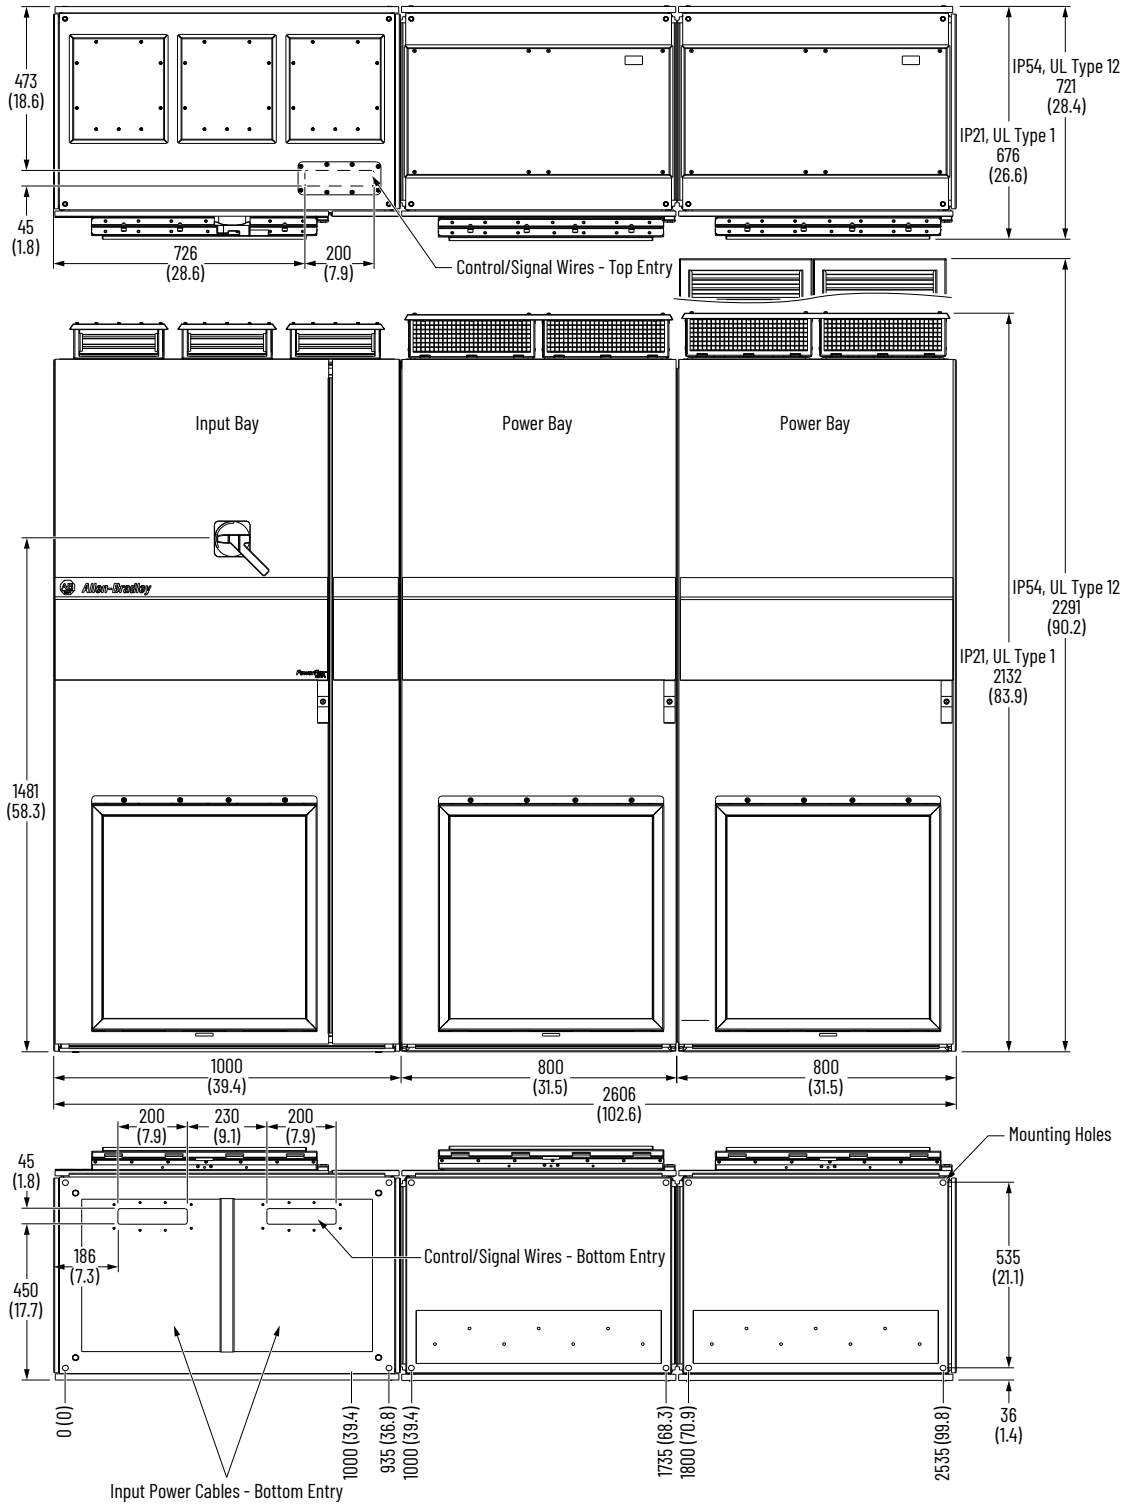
Frame 10 Bus Supplies Top, Front, and Bottom Views—Dimensions are in mm (in.)
